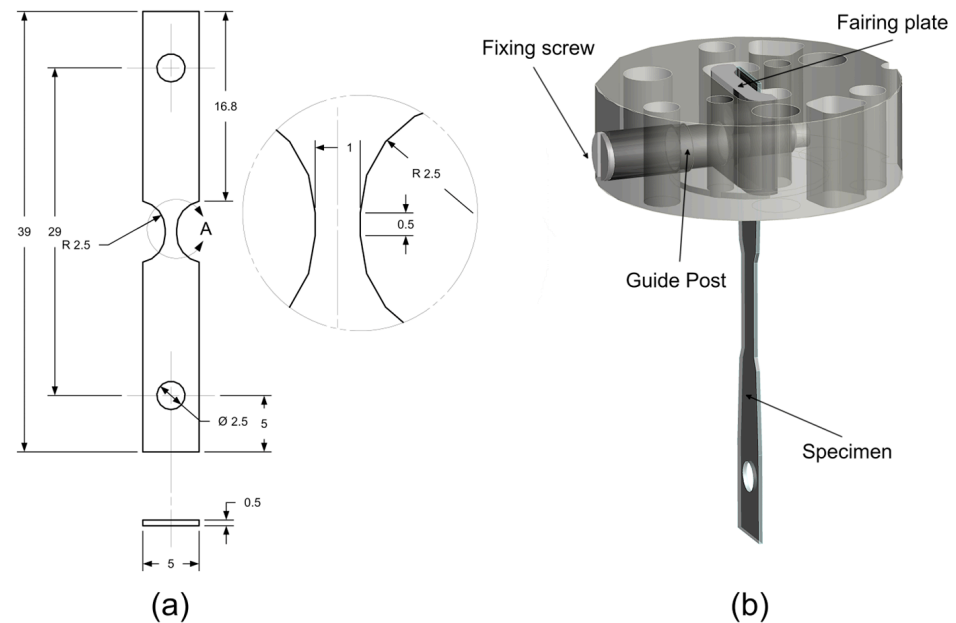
(a) Tensile specimen geometry and dimensions, and (b) model of fastening system.
